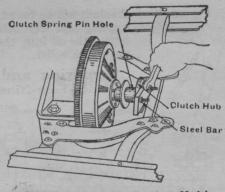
Removing clutch spring—Models Four-Ninety, Superior, G and FA
